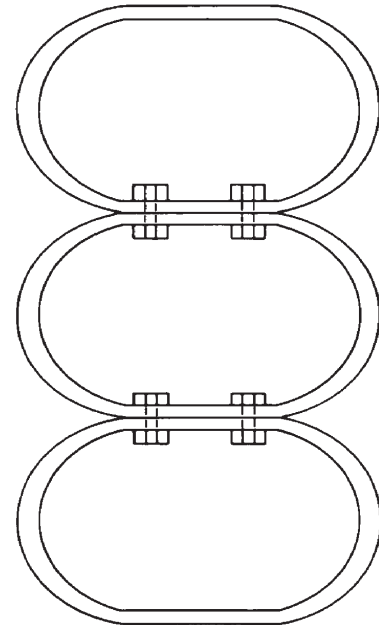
Composite Elliptic Spring [ASM Engineers' Guide to Composite Materials]
